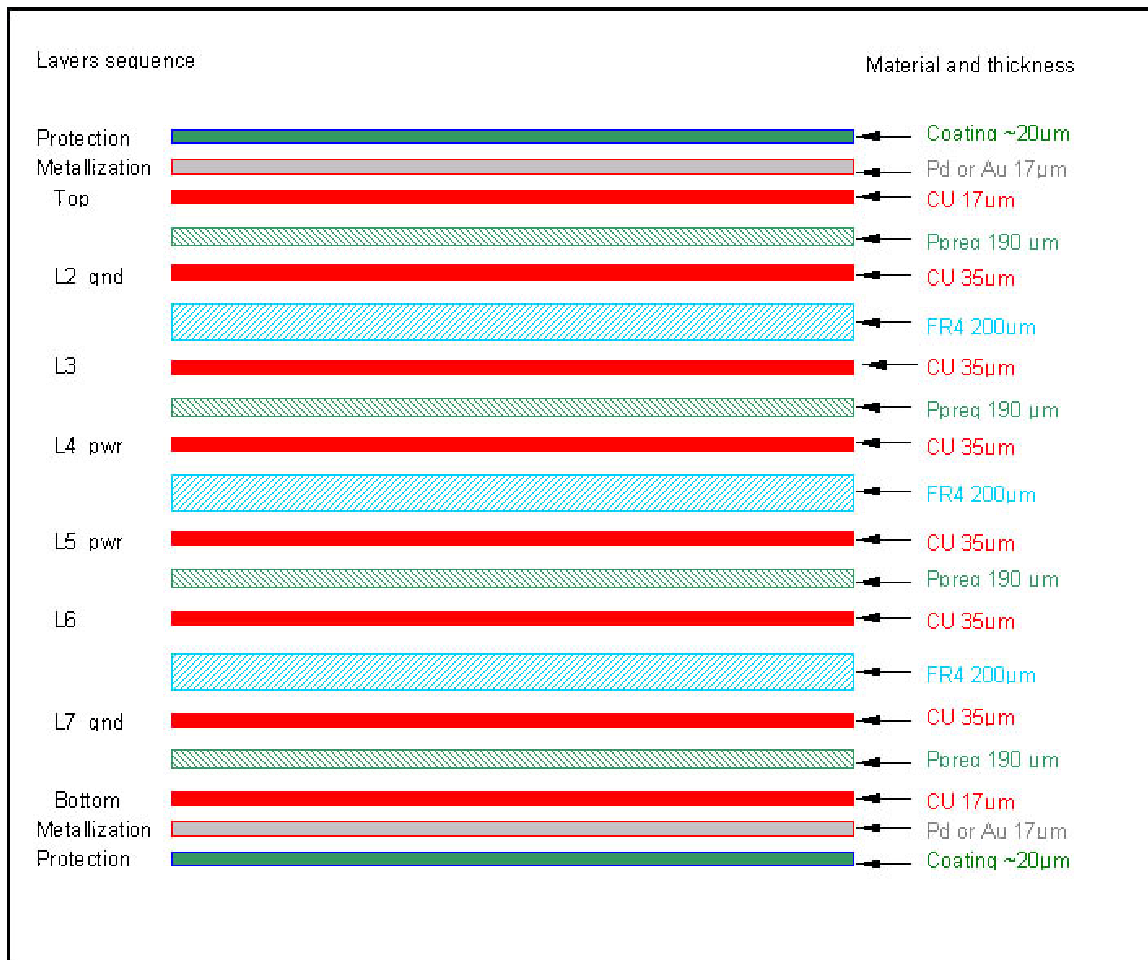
Cross section of the FEC printed circuit board. The PCB has a thickness of 1678µm and is the manufactured in class 5.
